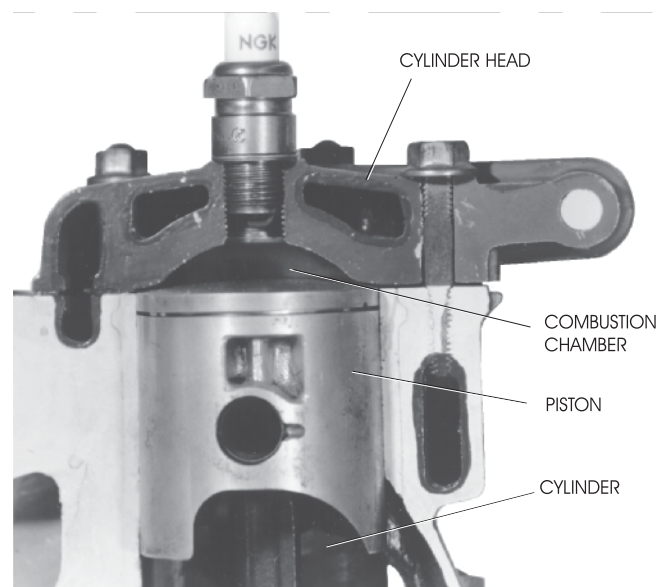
The piston, cylinder, and cylinder head. The small space between the top of the piston and cylinder head is called the combustion chamber.
